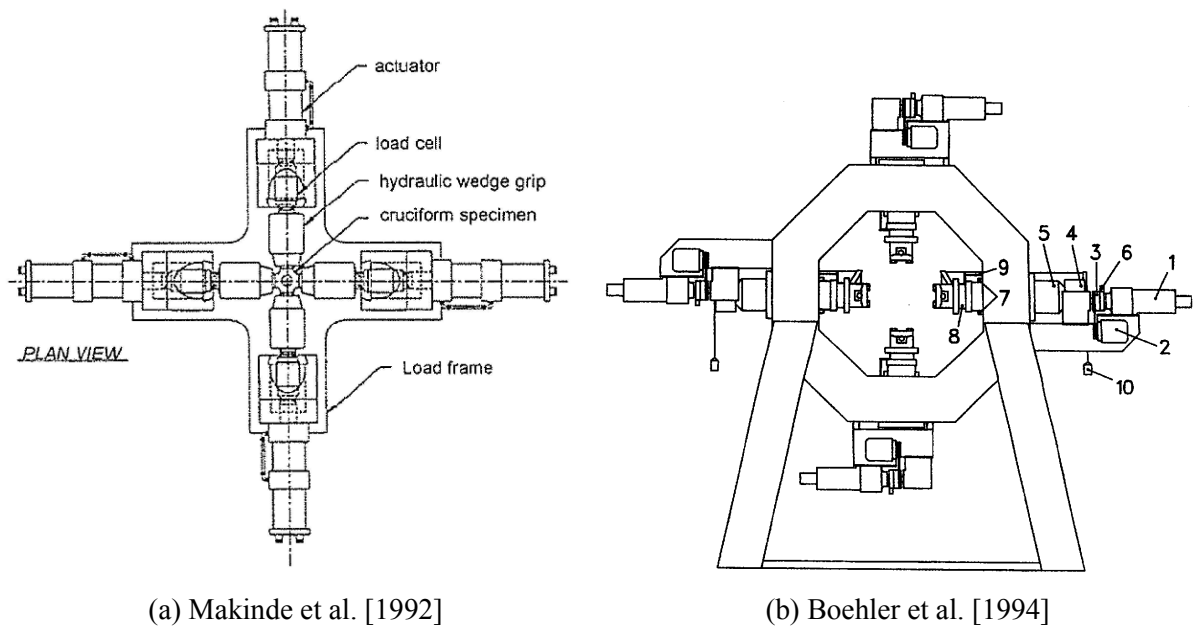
Various types of biaxial testing machines for cruciform specimen.
